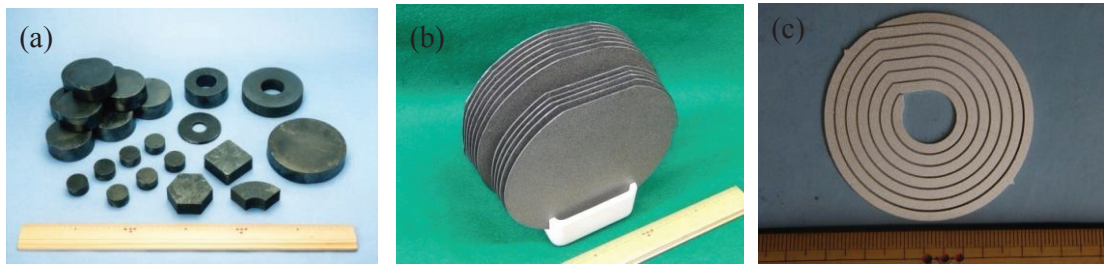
Examples of machined bulks: (a) various shapes, (b) thin-sliced disks and (c) a coil-shaped sample.
